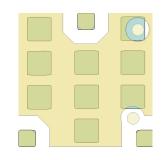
Solder Stencil Overlaid on ACMD-7403 Bottom Metal Pattern
